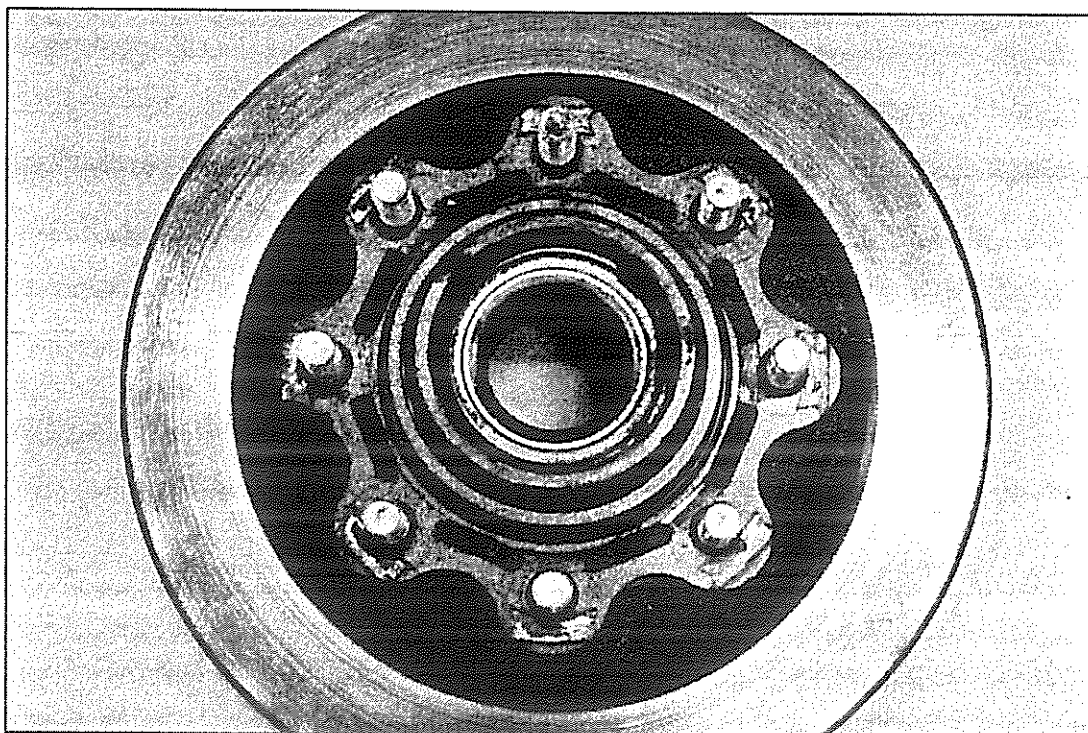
Right rear rotor showing that the wear was located primarily on the hub face outboard of the wheel bolt
